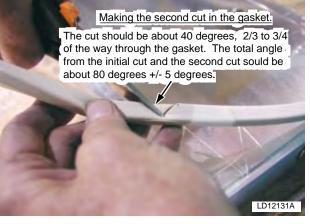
MAKING SECOND CUT ON GASKET
